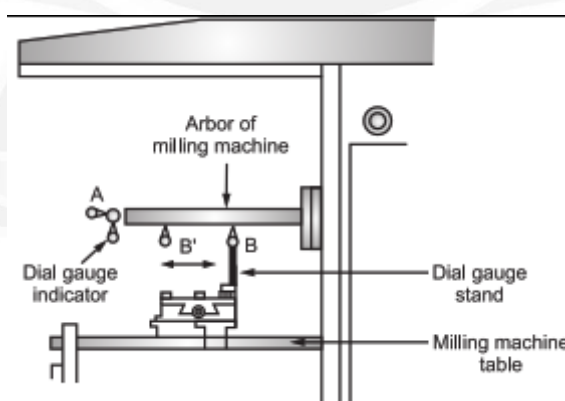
Transverse Movement Parallelism with Spindle Axis
